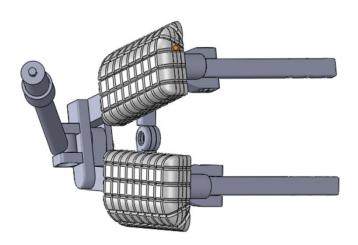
Prototype Version 2 with  $2^{nd}$  version of pad design
